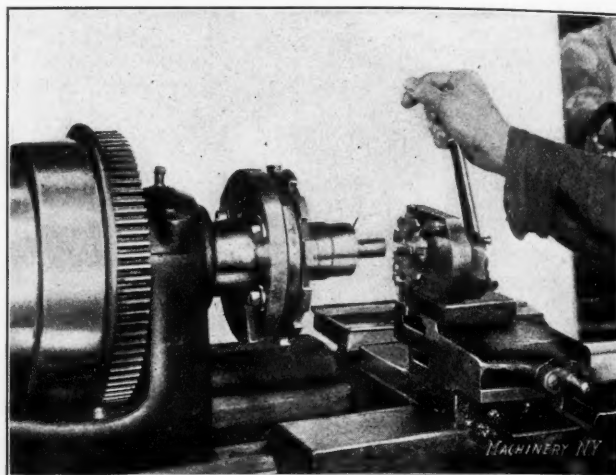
Threading the Gear Case Covers with a Rivett-Dock Threading Tool
